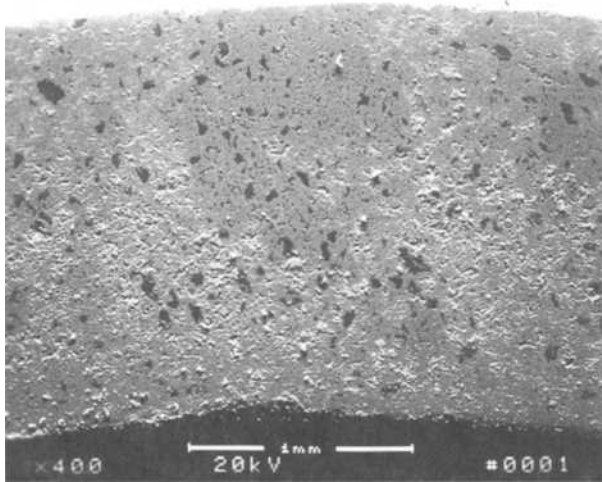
Nonleaking seal face with dried coolant crystals on surface, primary ring.
